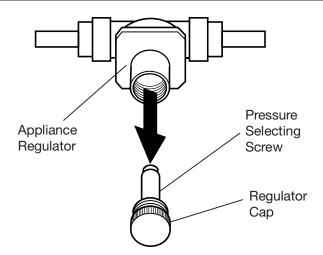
Gas Selection Valve Knob and Regulator Cap
